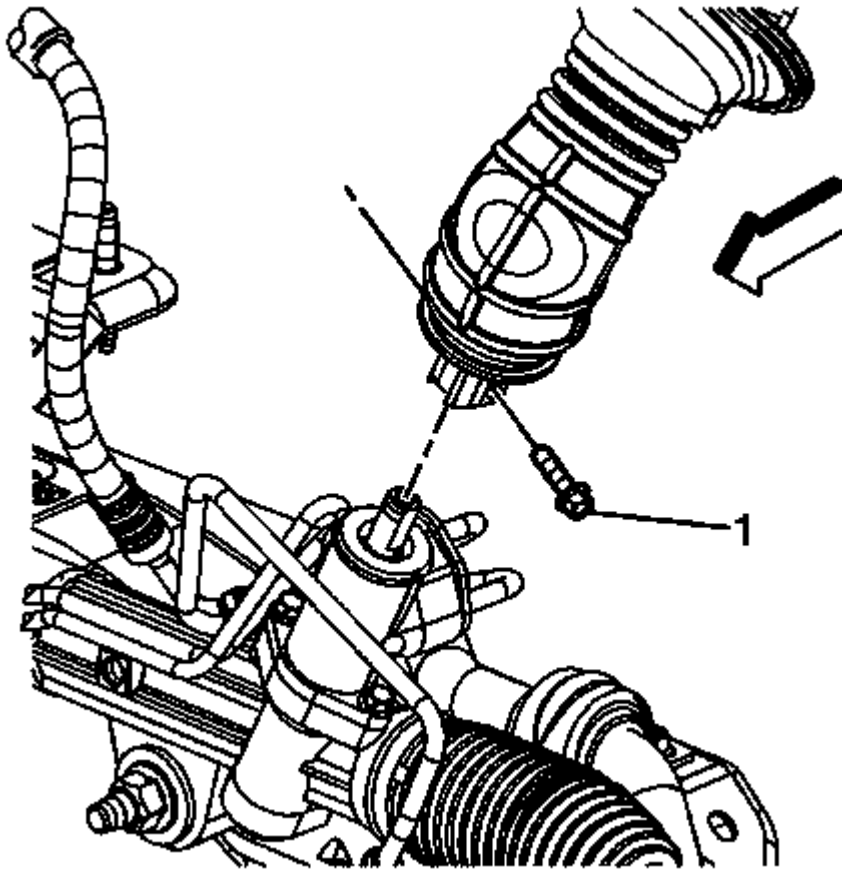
Identifying Intermediate Steering Shaft Bolt
